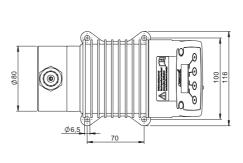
Dimensioned drawing of MAGDOS LK with dosing head made of stainless steel 1.4571 (all dimensions in mm)
